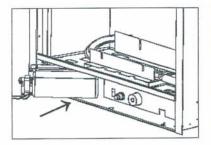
Insert blower assembly into the bottom space of burner pan according to Figure 7. Pay attention not to touch wires inside.
